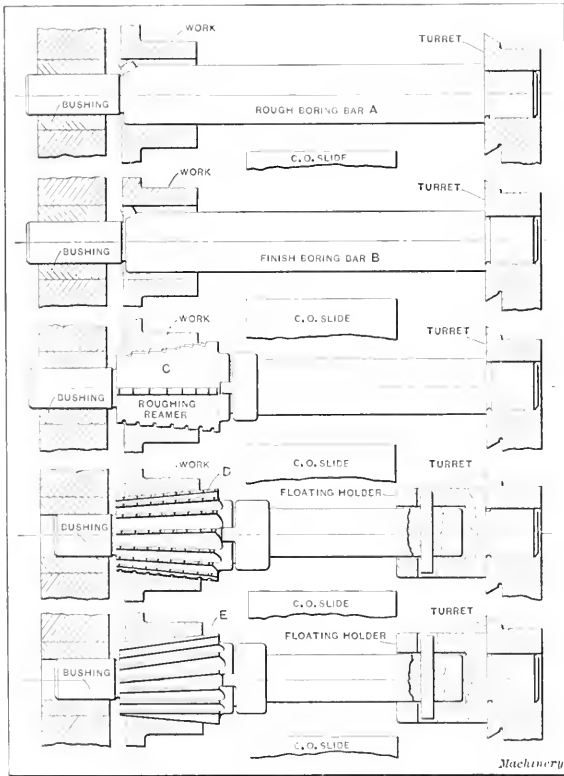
Typical Boring Tools and Reamers for Taper Holes
